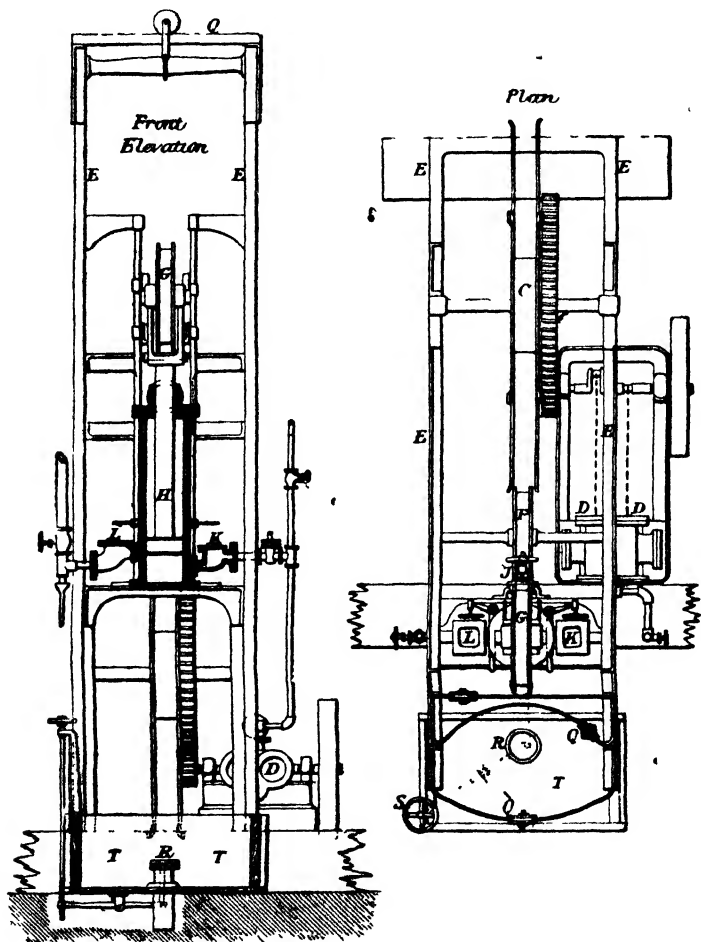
MATHER & PLATT SMALL BORING MACHINE.
